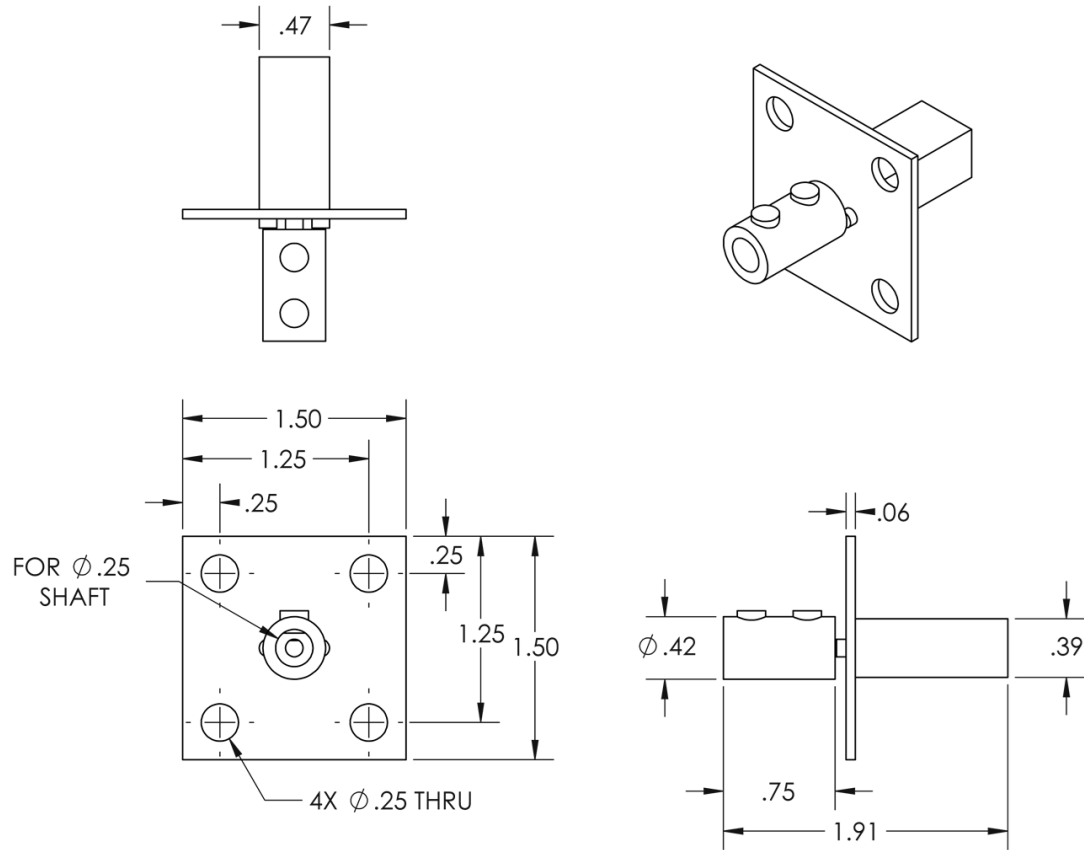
Major dimensions (in inches) of gearmotor assembly
